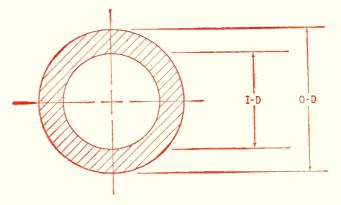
Key to dimensions given in Table II. Cross sectional view of circulor waveguide
